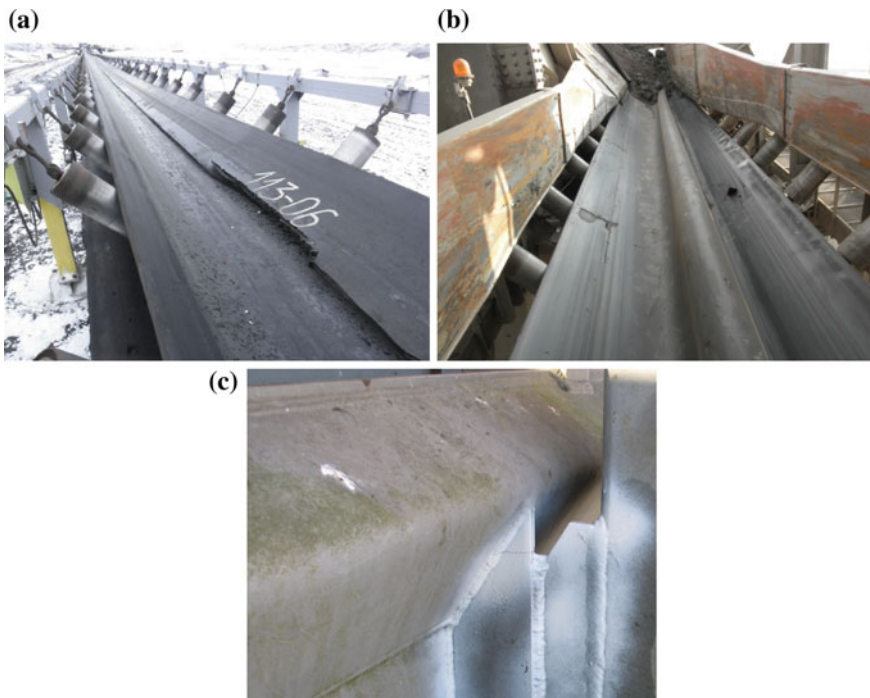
Examples of damage: a, b damage to conveyor belts; c damage to elements that support the rollers
